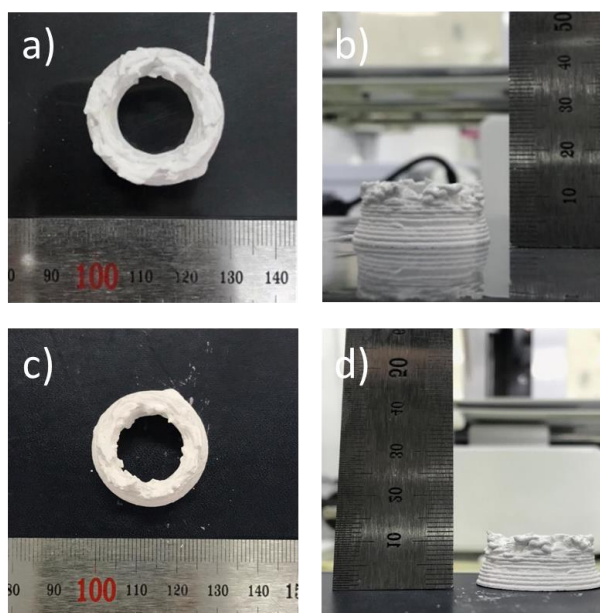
Printed samples after improving ink paste with 20wt%acetone 2wt%HEC 10wt%PEG1500 a) after printing (top view), b) after printing (side view), c) after sintering (top view), and d) after sintering (side view)
